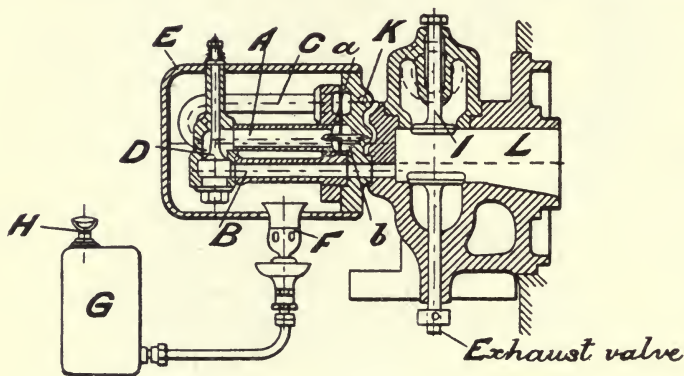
Fielding & Platt's Oil Engine (section through vaporiser).
